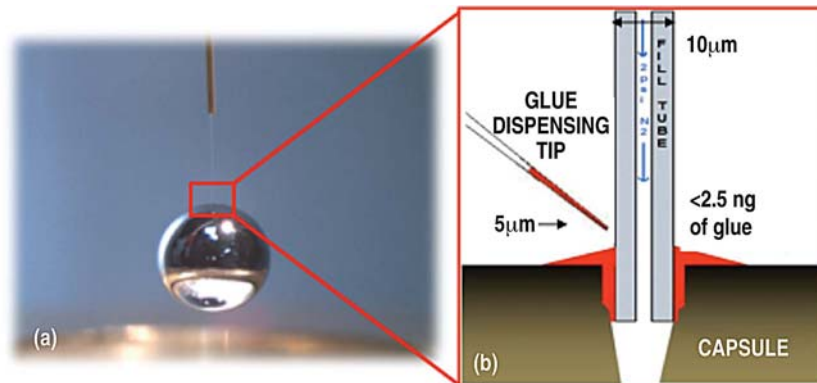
A– Optical image of a capsule attached to a fill tube; B– Cartoon representation of dispensing the glue to create joint
